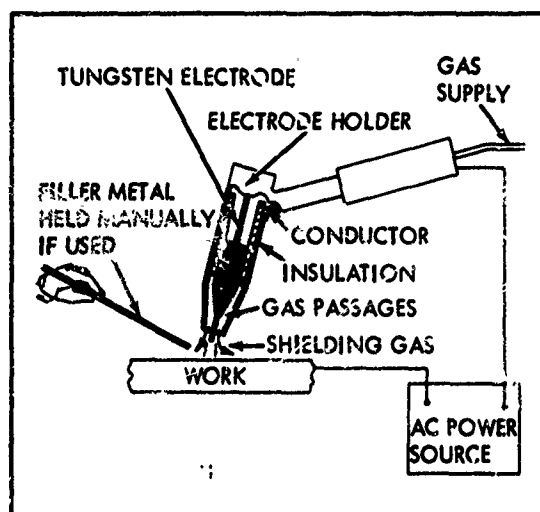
Schematic Diagram of Equipment for Inert Gas Tungsten Arc Welding
